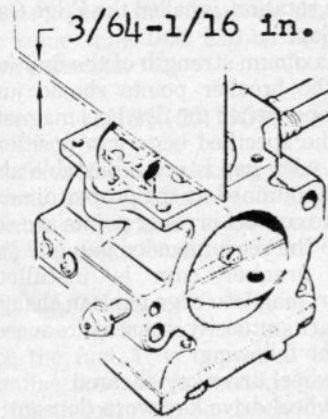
Diaphragm lever on Walbro WB carburetor should be $3/64-1/16$ inch from carburetor body.
